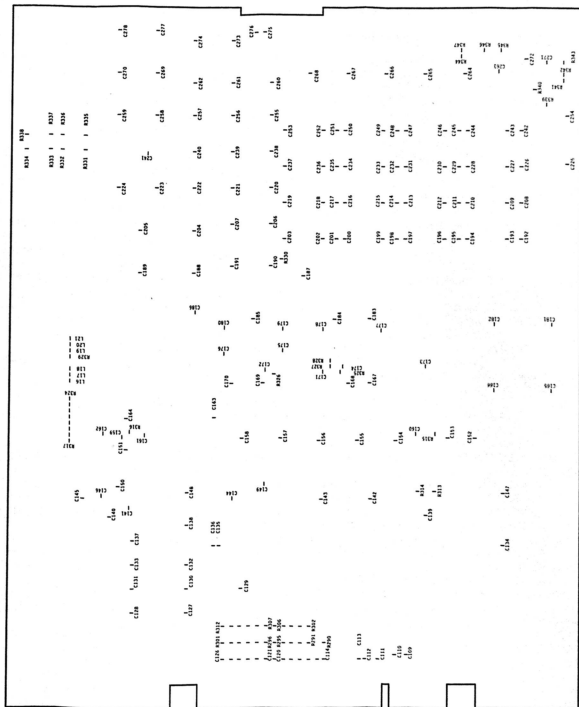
Area 51 Cojag PCB Assembly (Bottom Side)
